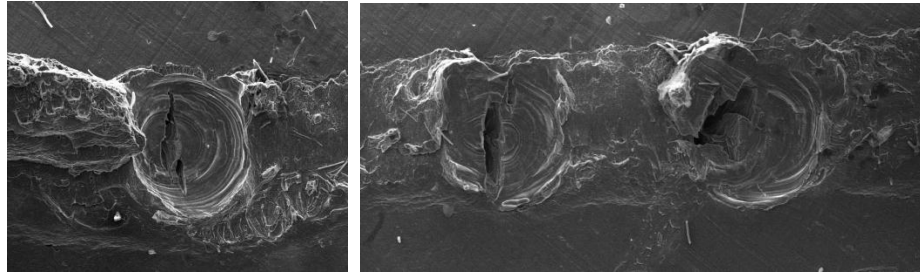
Solidification cracks at the interface of the welded joint
